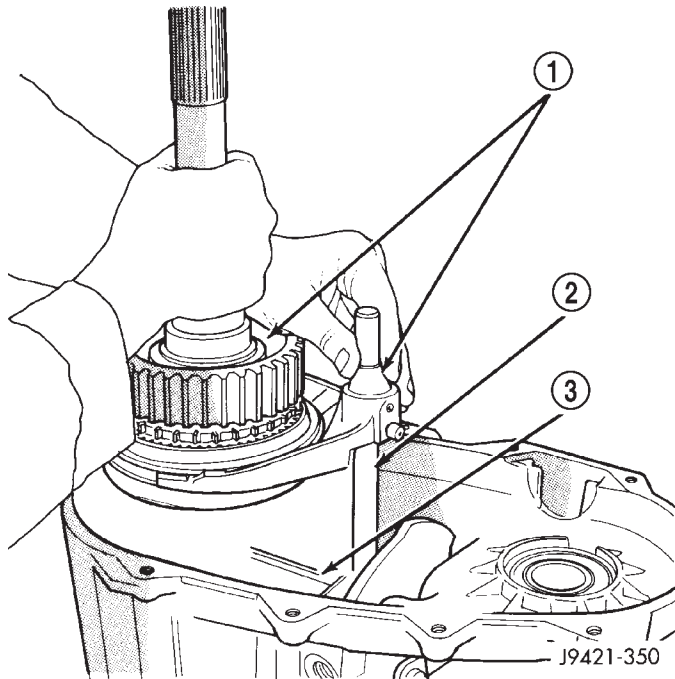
Installing Mainshaft And Mode Fork Assembly
